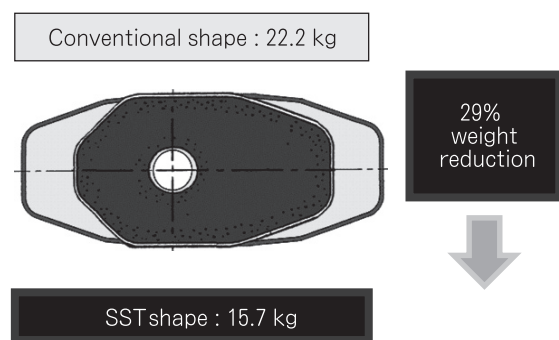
Plate brick shape of SST at ArcelorMittal Tubarão.
